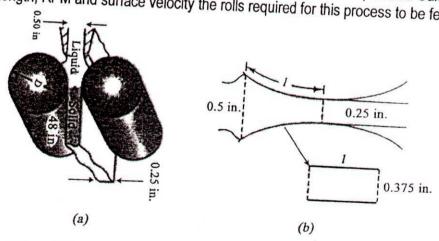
Strip casting of plate: (a) schematic of the process using two counter rotating rolls and (b) element of liquid metal in touch with rolls.
